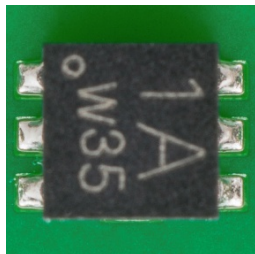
DFN2020MD-6 (SOT1220) - Component D169 with tin-plated wettable side pads
